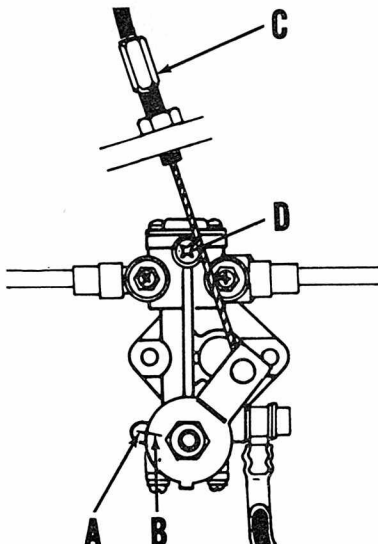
Turn cable adjuster (C) to obtain proper alignment of marks (A&B).
